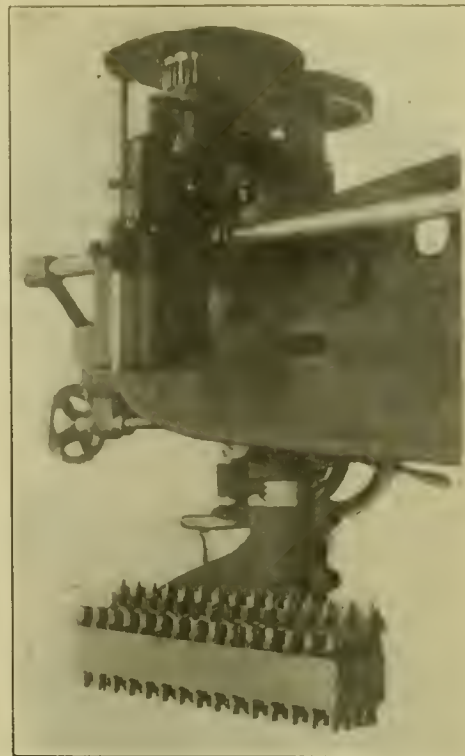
MULTIPLE DRILLING DEVICE.—MUELLER MACHINE TOOL CO.
